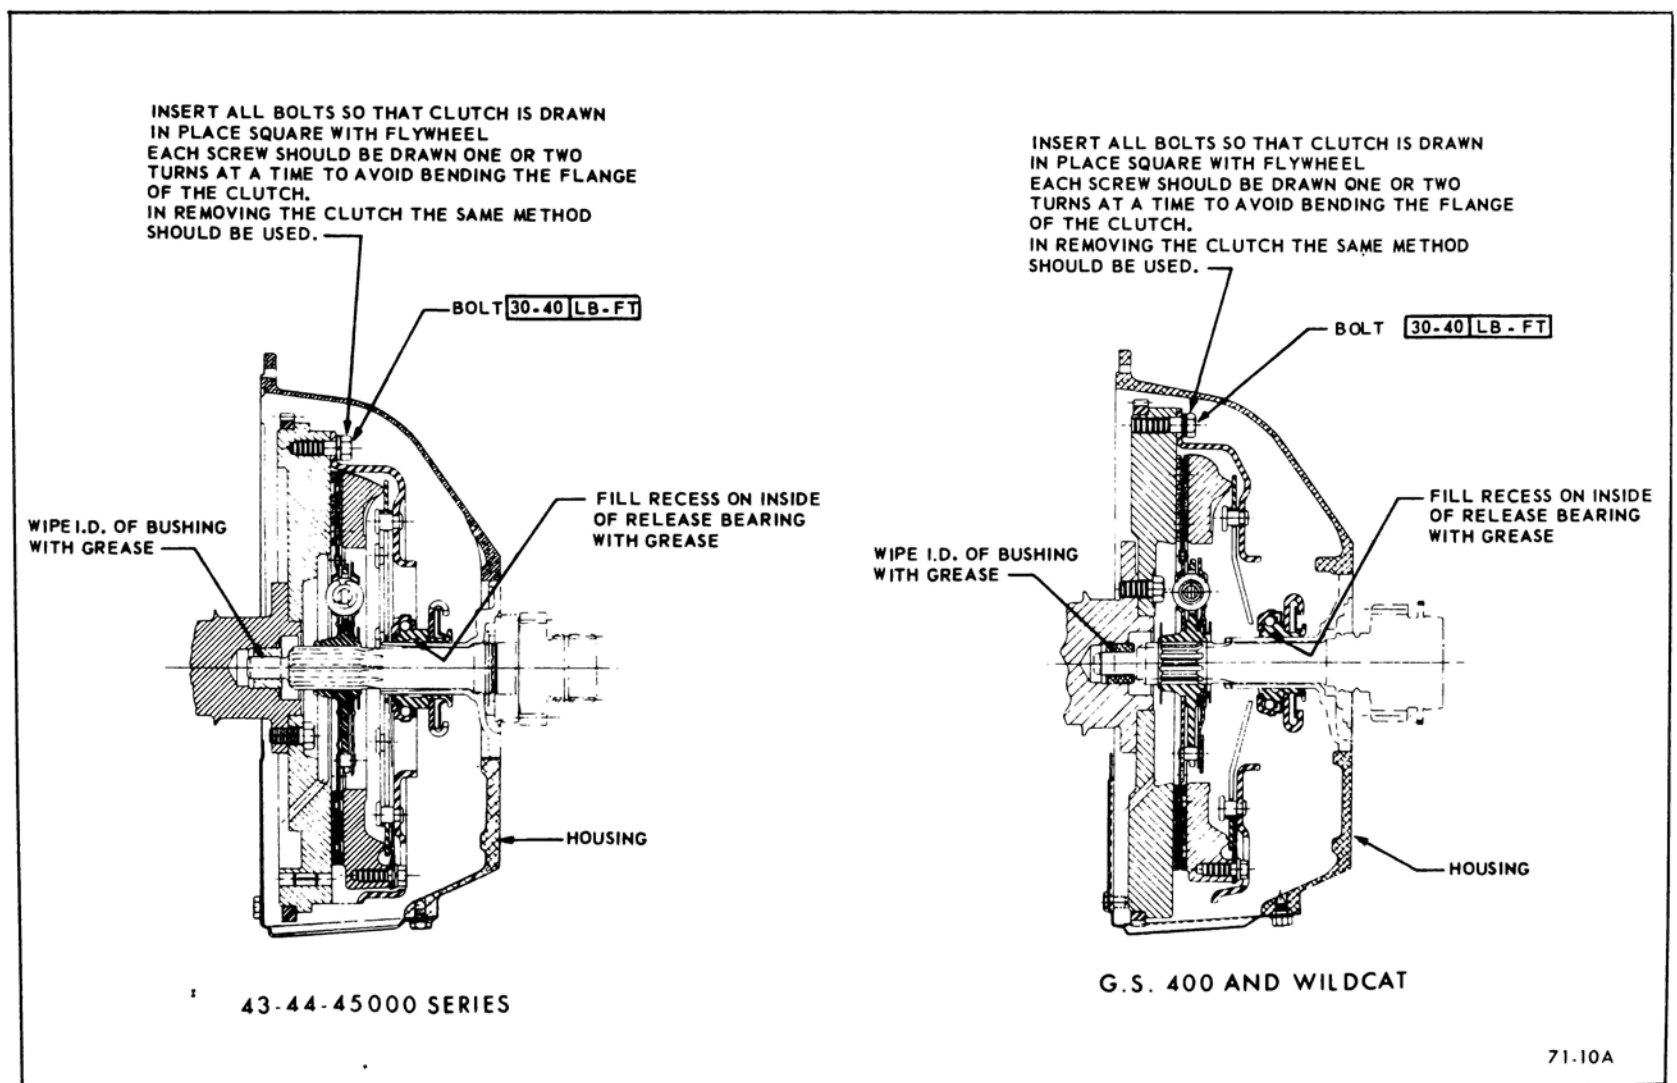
43-44-45-44600 (G.S. 400)—46000 Clutch Assemblies
